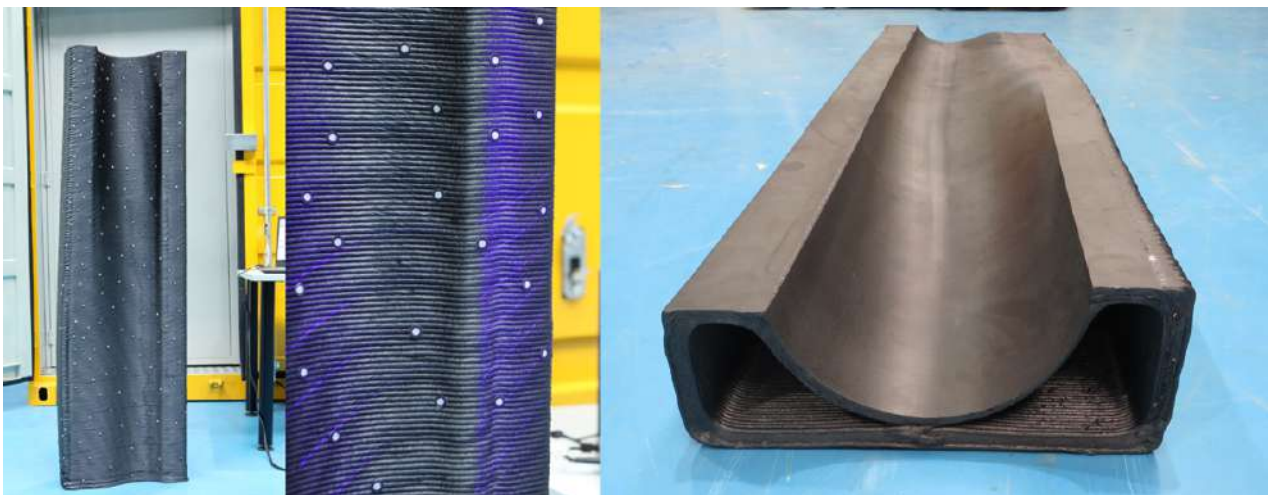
Example of large format FGF mould manufactured at AIMEN with FGF CEAD equipment using PEI-CF material. Left images display “as printed” condition and right image shows part after precision machining to achieve final part geometry.
